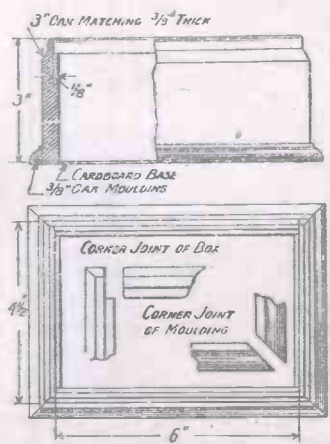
(right).—Part-sectional Elevation and Plan of Case.
